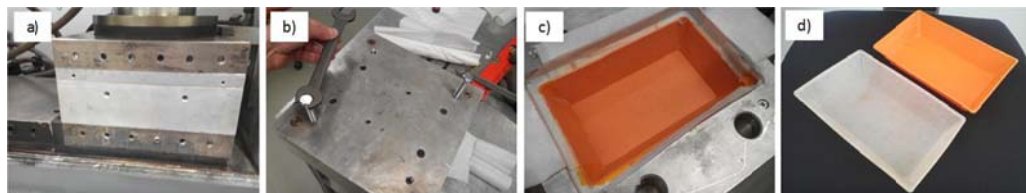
a) Mould placed between the hot-plates during thermoforming. b) Extraction of the upper part of the mould by screws. c) Thermoformed tray inside the mould. d) Two kinds of solid flexible trays produced after this process.
